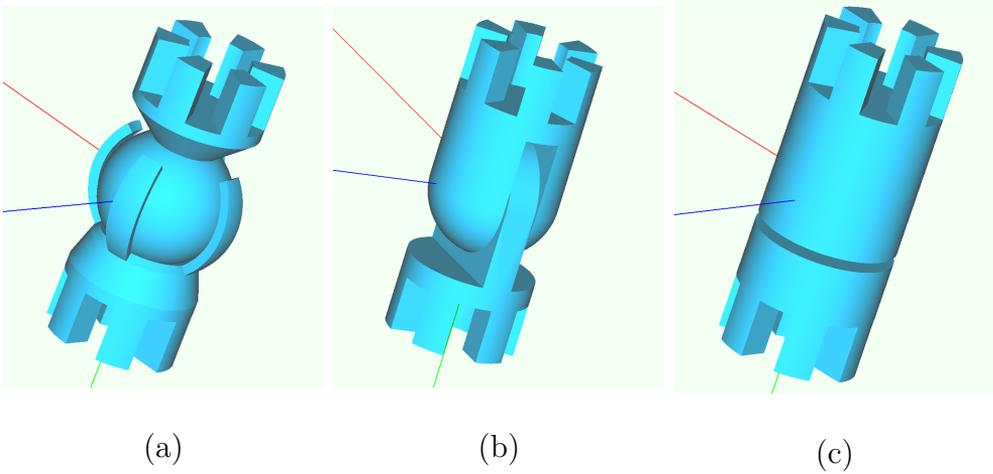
Examples of joint: (a) ball-socket joint, (b) hinge joint, and (c) pivot joint
